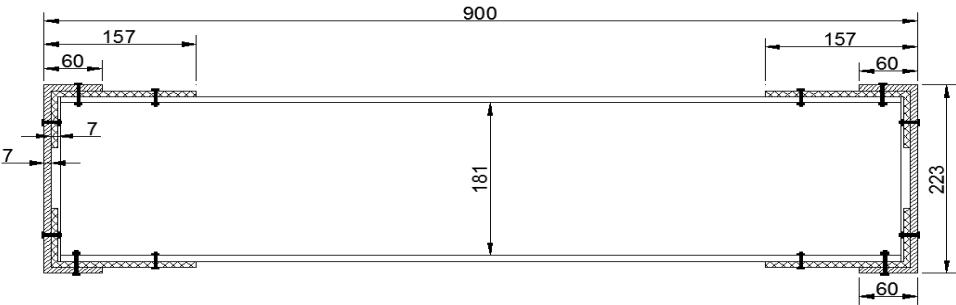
Cross section of test truck frame (All dimensions are in mm)
